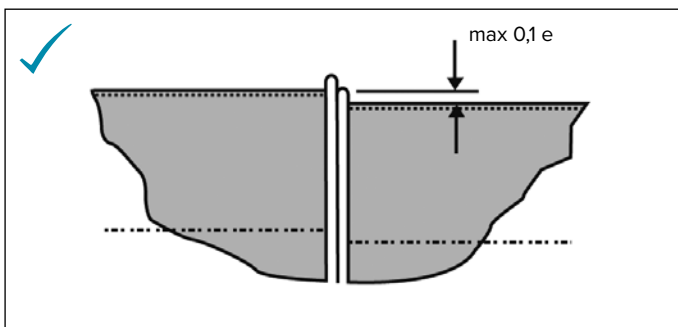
Butt-weld with mis-alignment of pipe (acceptable)
